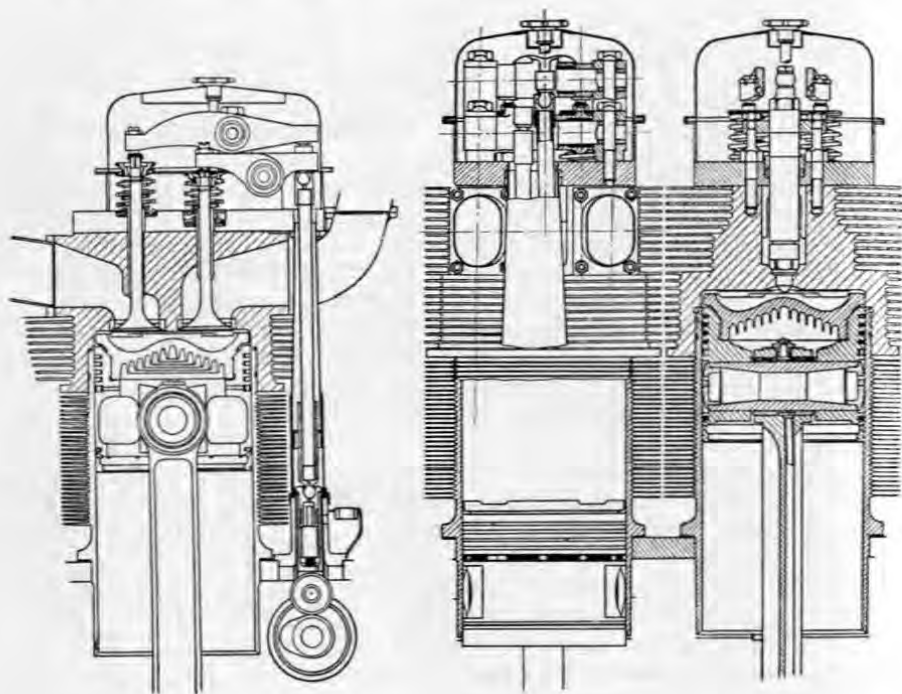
Four-valve cylinder head of an air-cooled compression-ignition engine of a 140 mm bore.
